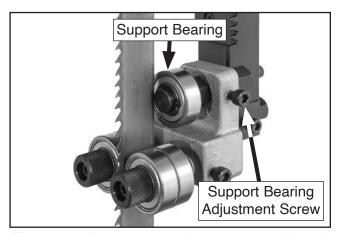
Upper support bearing assembly and controls (guide post cover removed for clarity).
